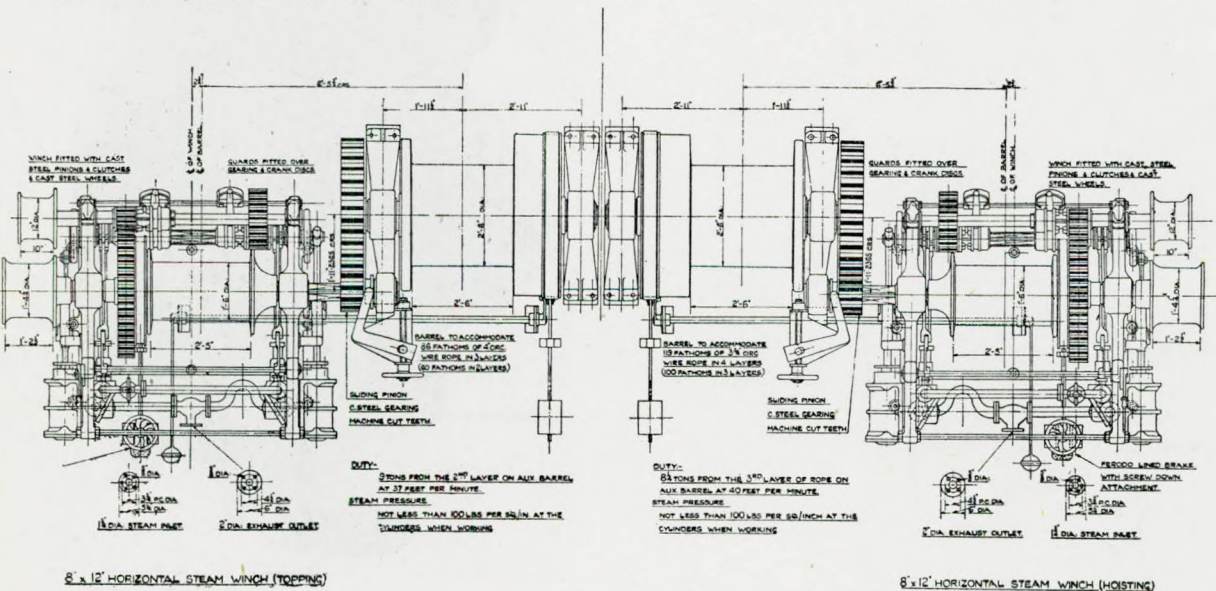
Heavy derrick arrangement with two winches hoisting and two winches topping.
